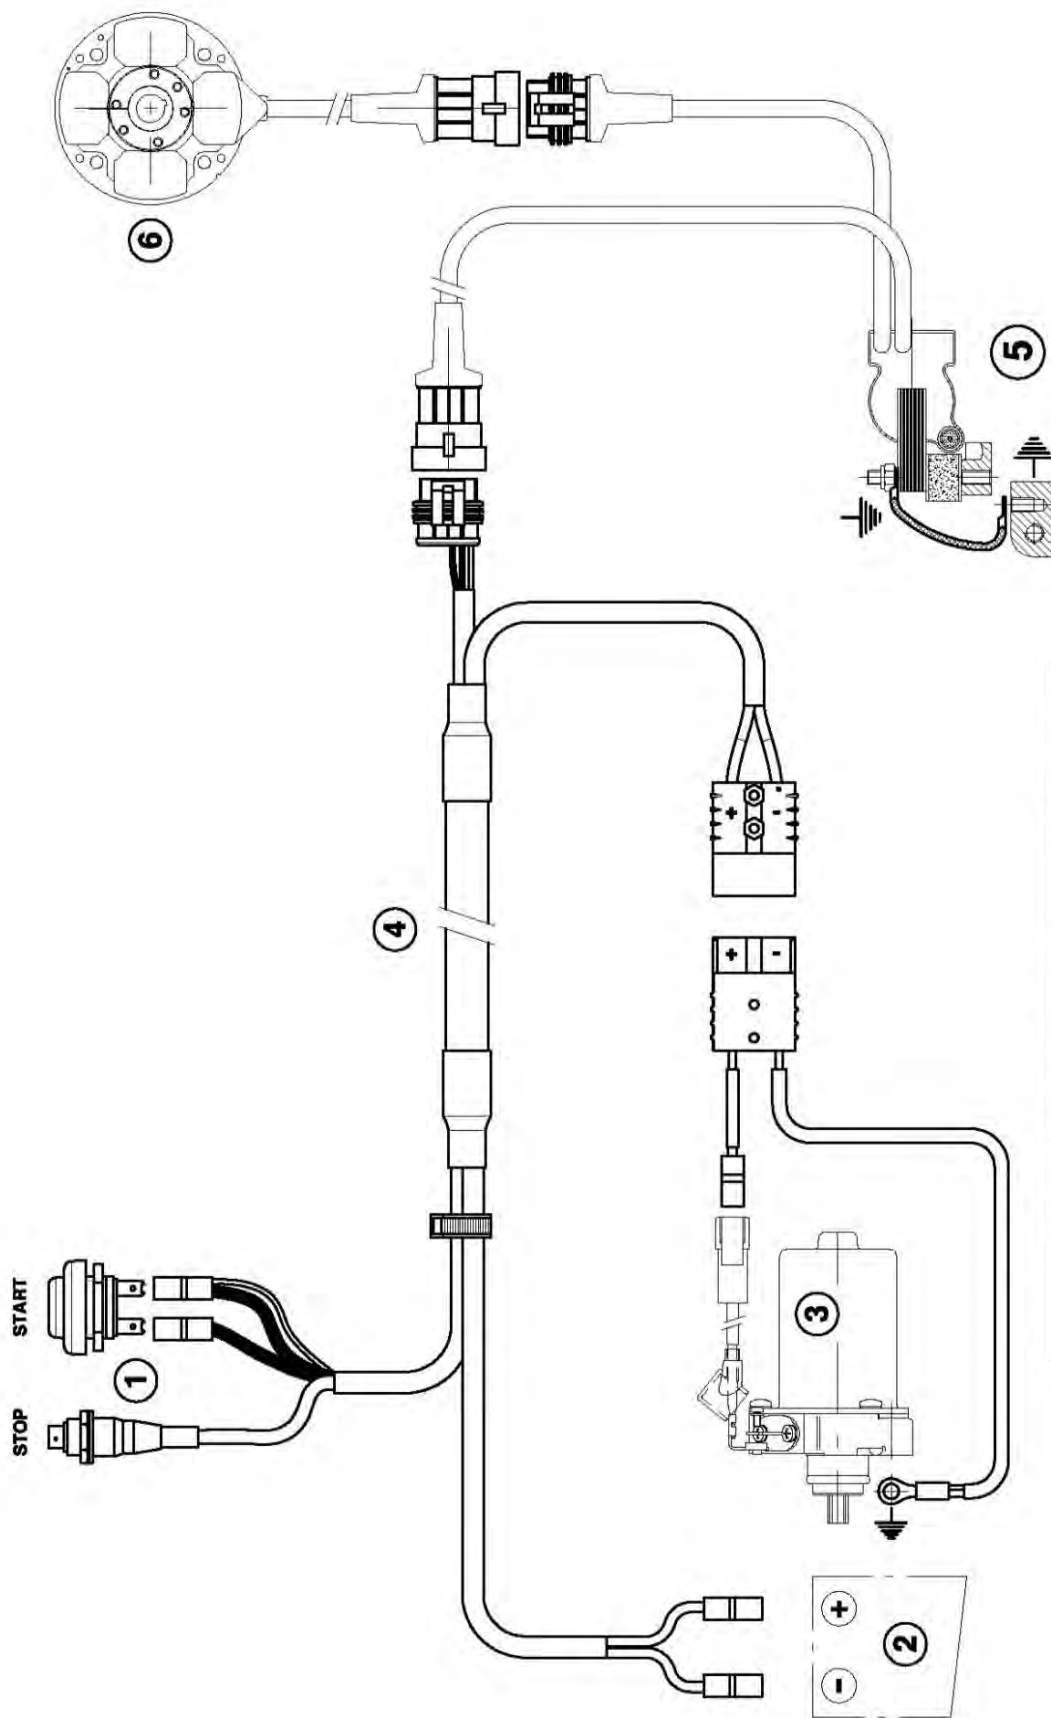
PHOTO COMPLETE ALTERNATIVE WIRING LOOM
